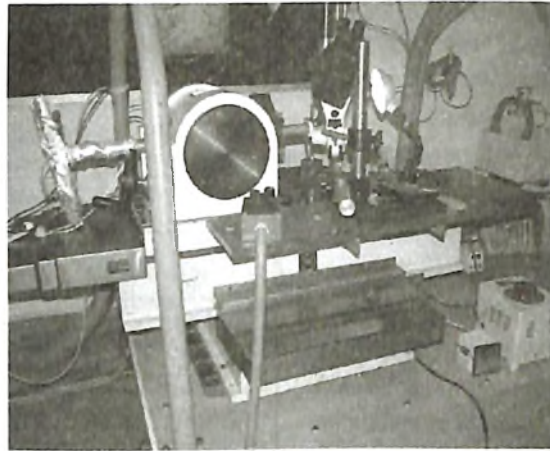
Photograph of laser welding set up for the ECPS coil termination arrangement
